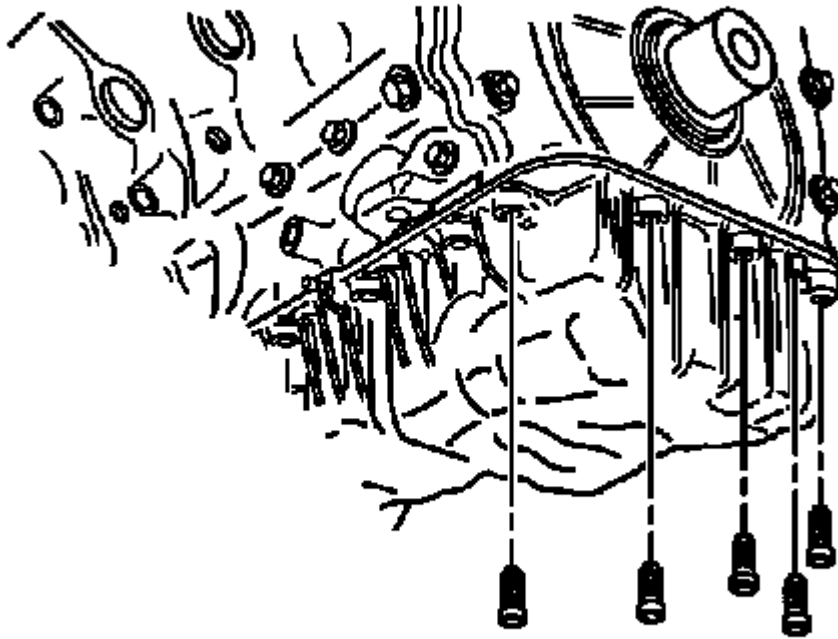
View Of Upper Oil Pan To Engine Front Cover Bolts
